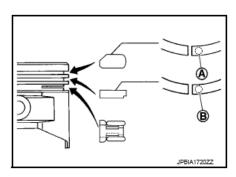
Identifying Stamped Mark On Piston Rings Courtesy of NISSAN MOTOR CO., U.S.A.
